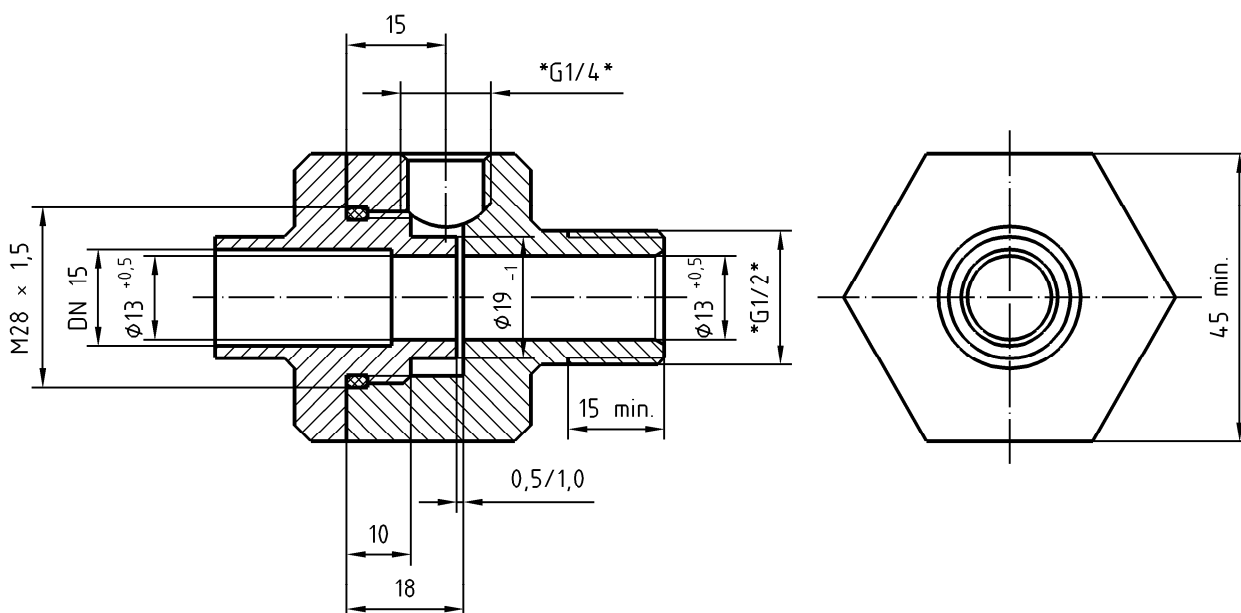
Pressure take-off tee (unspecified tolerances $\pm 0,5$)"
